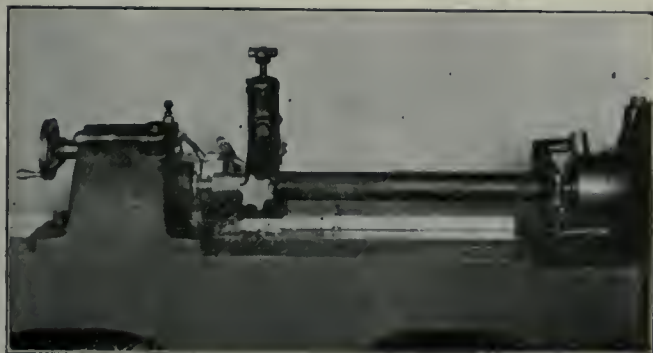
READY TO START CUTTING WITH SECOND TOOL.
